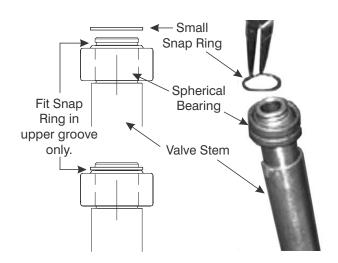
Snap Ring secures Spherical Bearing on Valve Stem.
